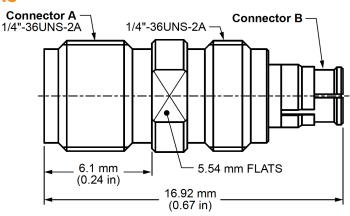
Product Dimensions for the ADP-SMAF-SMPF-G Adapter
